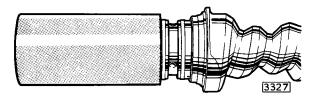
The valve seal compressor (Tool No. 11180 in position).
